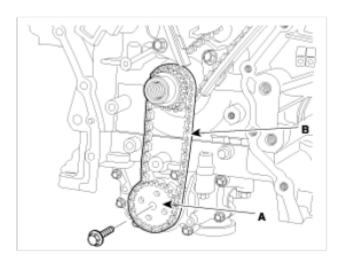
Identifying Oil Pump Chain Sprocket And Oil Pump Chain
